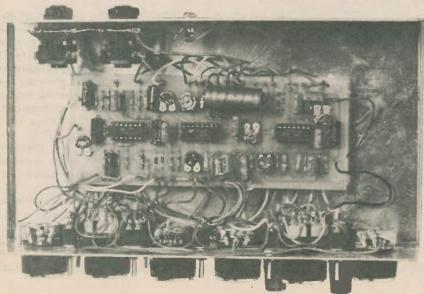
(Above) Showing the p.c.b. design and component layout of the Signal Generator. (Left) Photograph illustrating the internal view of the chassis assembly showing the switch, sockets and p.c.b. layout
